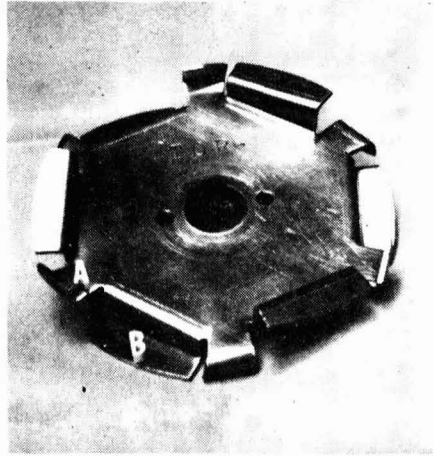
Modified sawtooth impeller. Note tilted plane, labelled "B"
